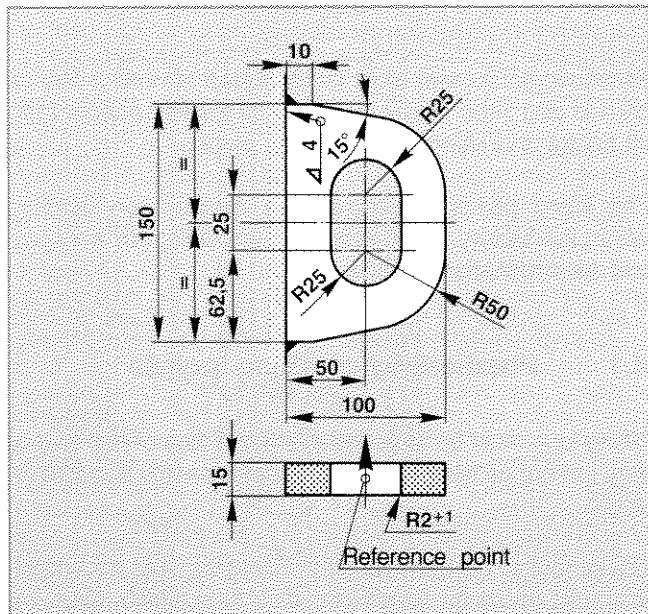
Lifting lug Type A for attaching container hooks to vertical surfaces
